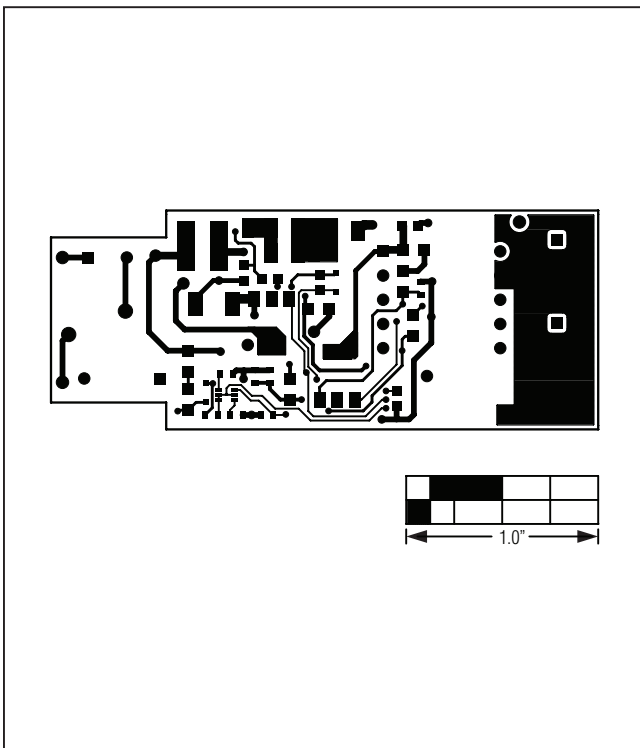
MAX16841 EV Kit PCB Layout—Component Side
